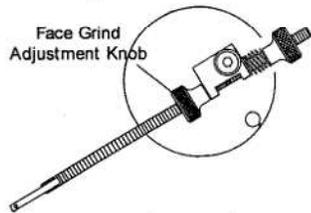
FACE GRIND ADJUSTMENT KNOB.
